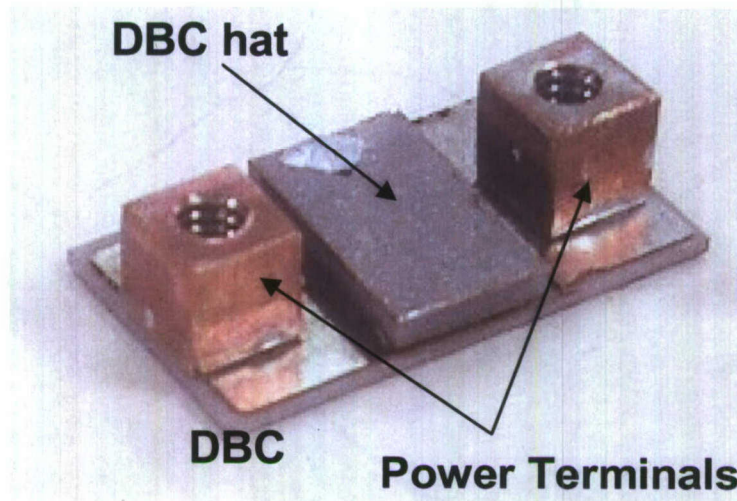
A Si diode packaged using the proposed packaging technique.
